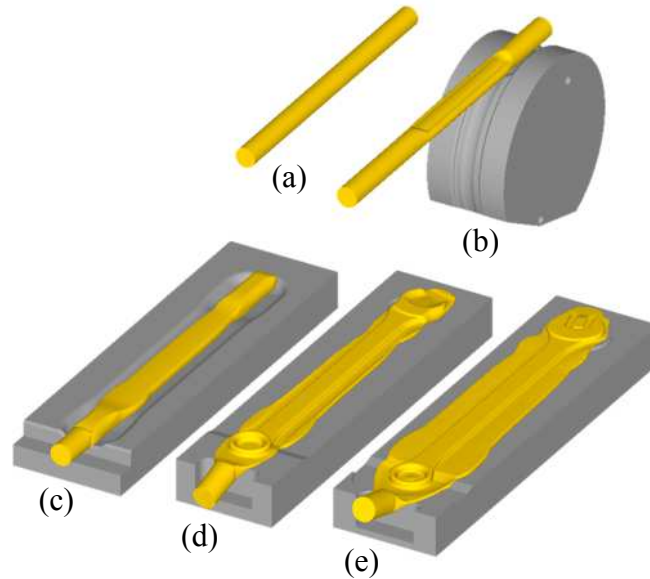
Simulation workpiece model results at the end of each operation, for the existing wrench forging process. (a) Starting billet and (b) Roll forming (c) Edger (d) Blocker (e) Finisher operation
